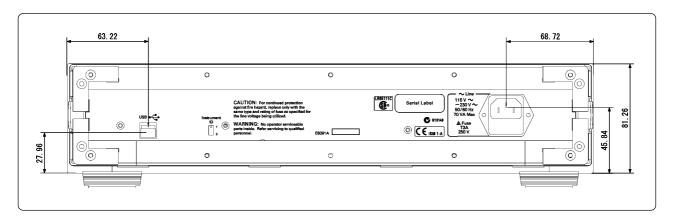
Dimensions (side view, in millimeters, nominal)
